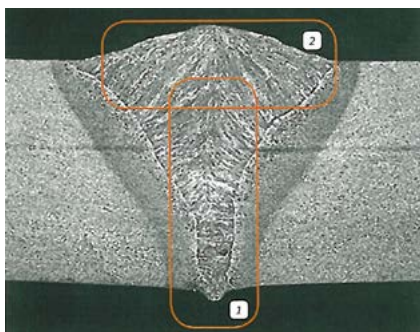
Weld shape obtained in hybrid welding, 1 – effect of deep penetration obtained by means of a laser, 2 – the upper area of a weld and a weld face formed by an electric arc with a filler metal addition [13]
